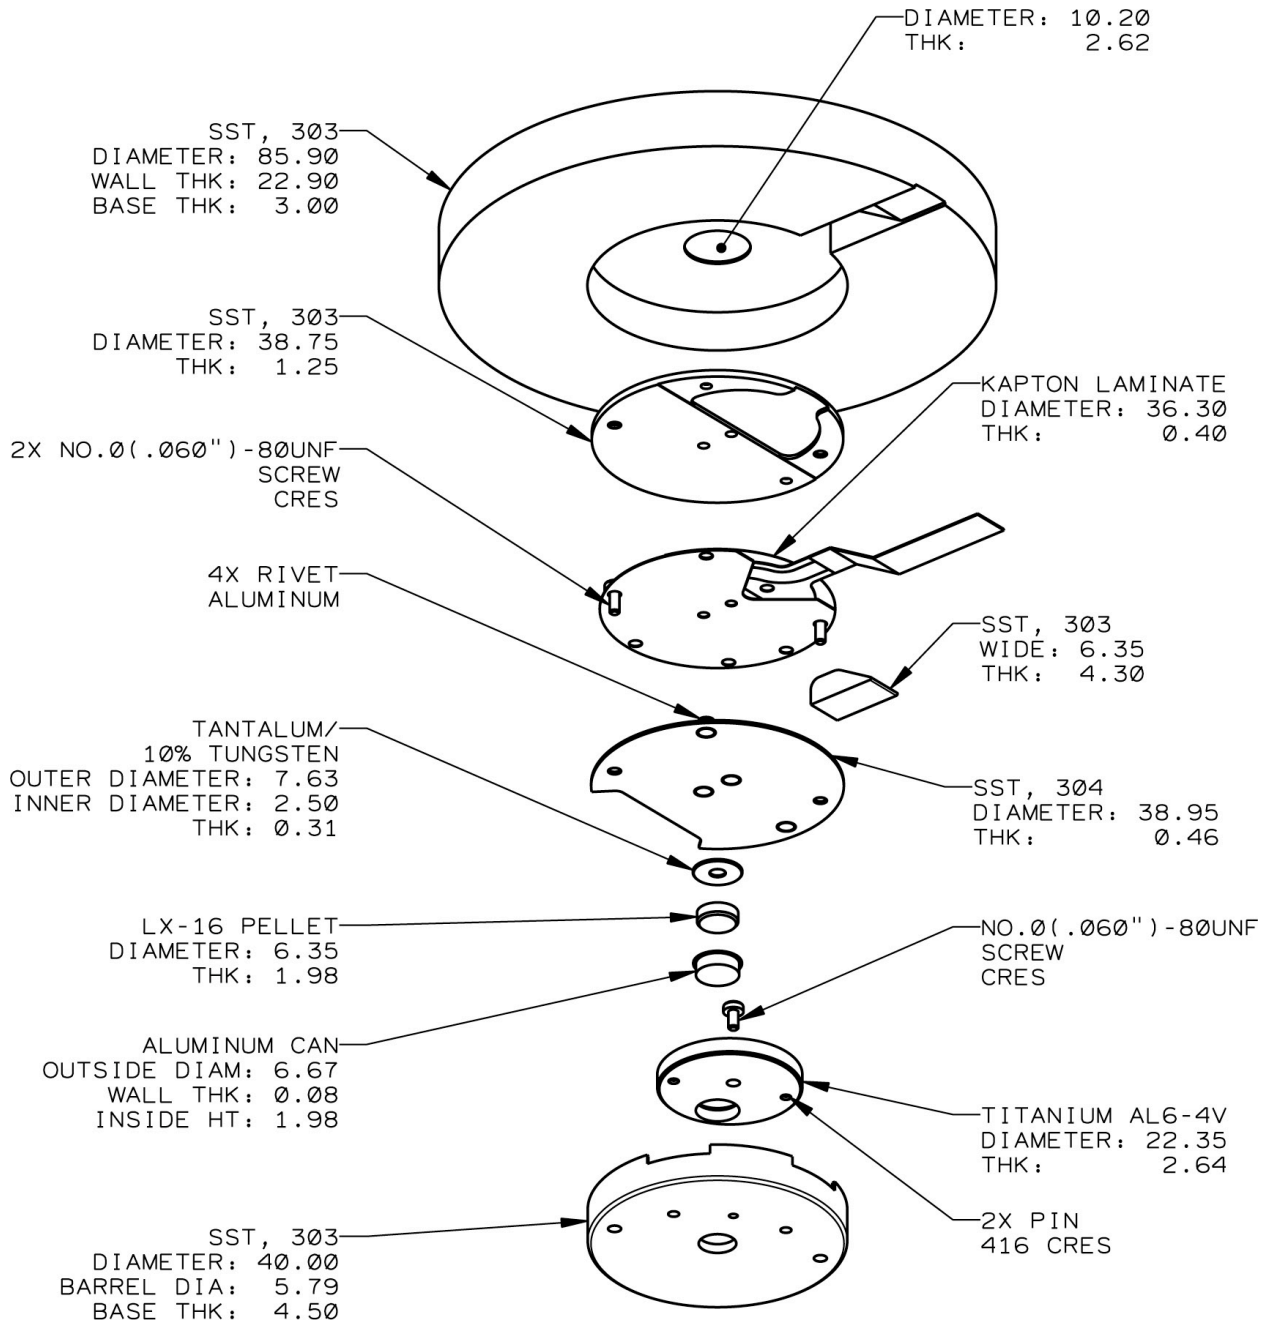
2021E PT5 & PT6 Shadowplate: Full Assembly Exploded Diagram
